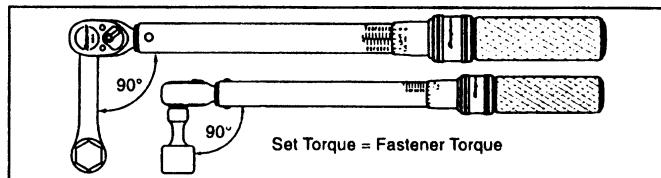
Using wobble extensions/universals with torque wrenches.
